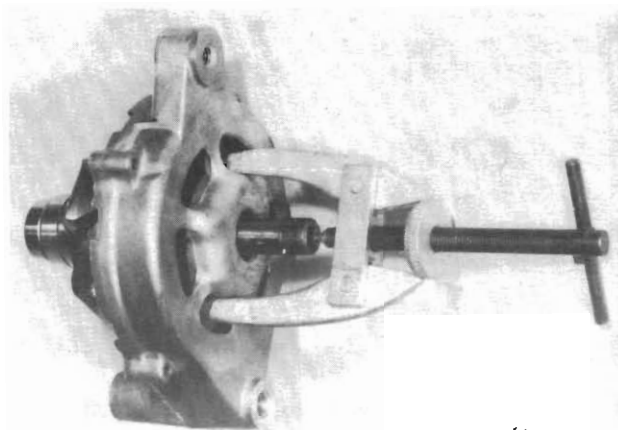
Pushing the Shaft from the Drive-End Bearing
